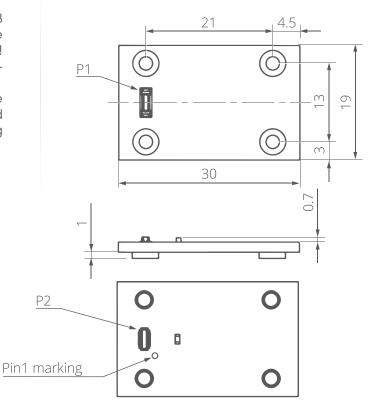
Dimensions of the AMS-100k-LPF (given in mm)
